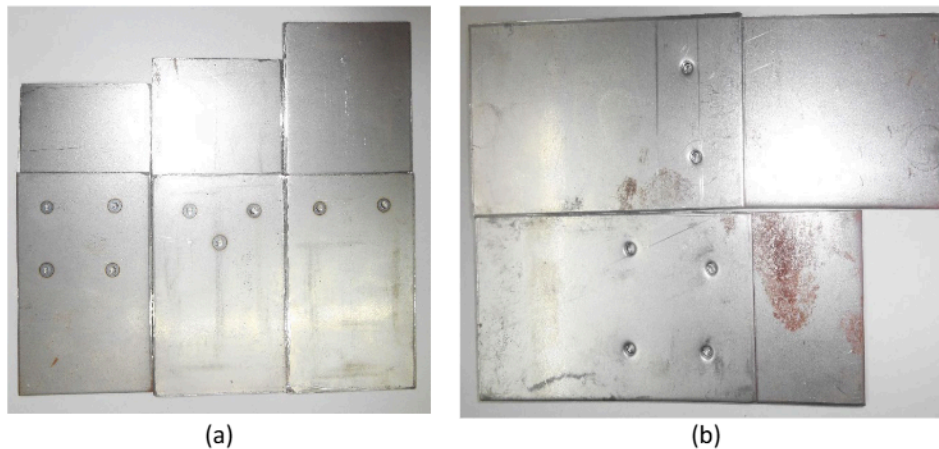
Visual representation of the (a) spot welding joint (b) clinching joint configurations
